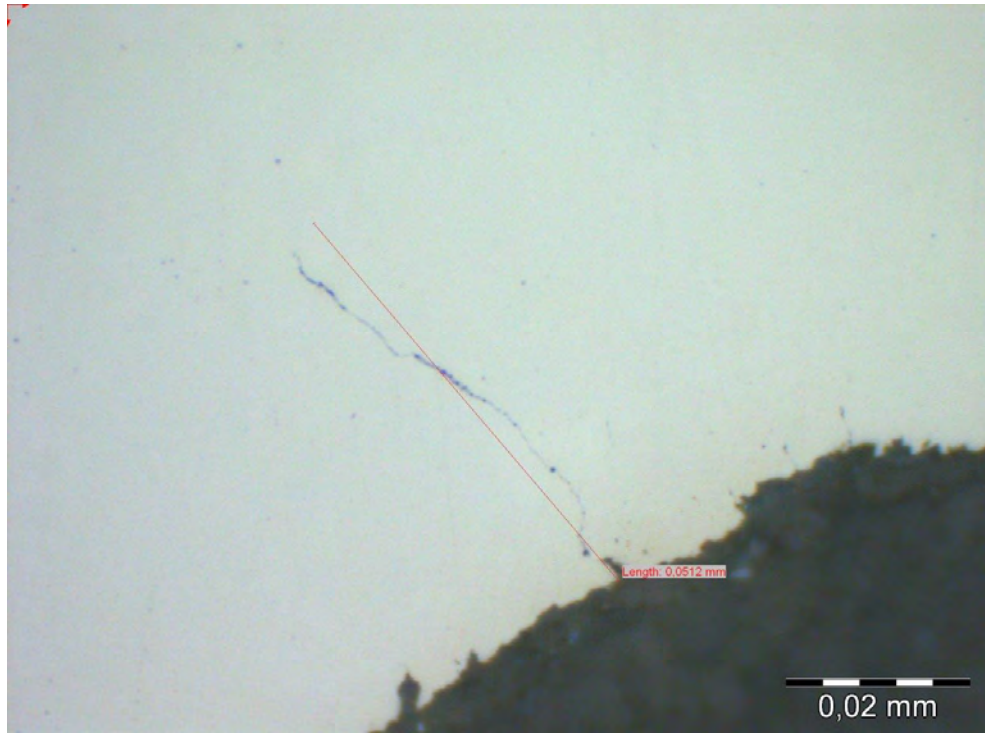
Crack at segment A, fourth ridge on barrel no. SFK 0123-A
